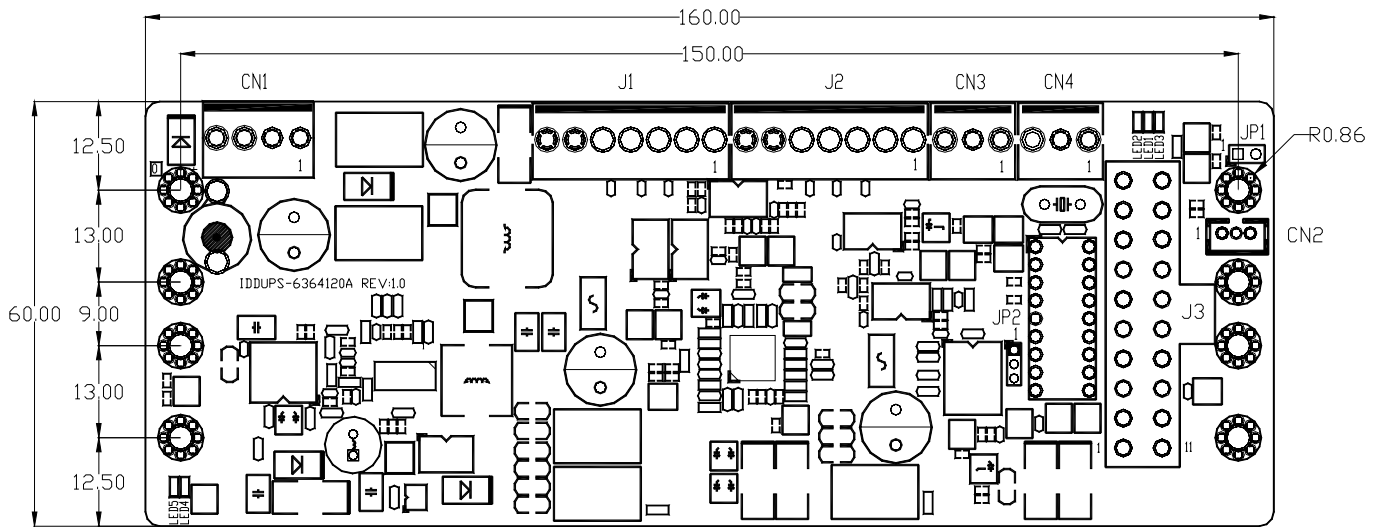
IDDUPS-6364120A Dimension Drawing (measurement units: millimeter)
